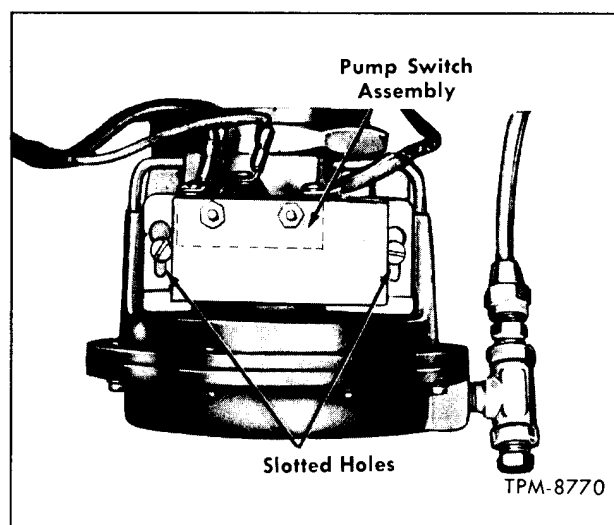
Water Booster Pump Switch Installed on Standard Water Valve
